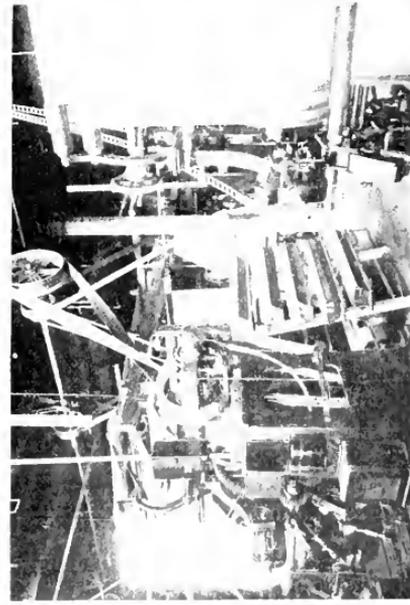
BTS 25-h.p., 1200-r.p.m., 550-volt Varying Speed Brush-shifting Motor (semi-automatic control) Driving a six color Press, Barton and Fales Cloth Printing Machine Imperial Printing and Finishing Co., Providence, R. I.
